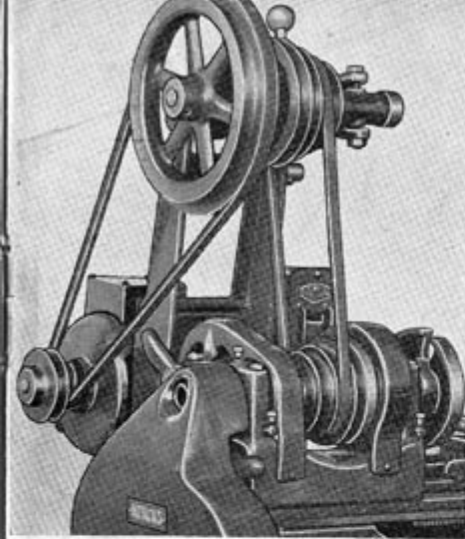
H TYPE DRIVE UNIT FITTED TO HERCUS 9" SWING LATHE.
